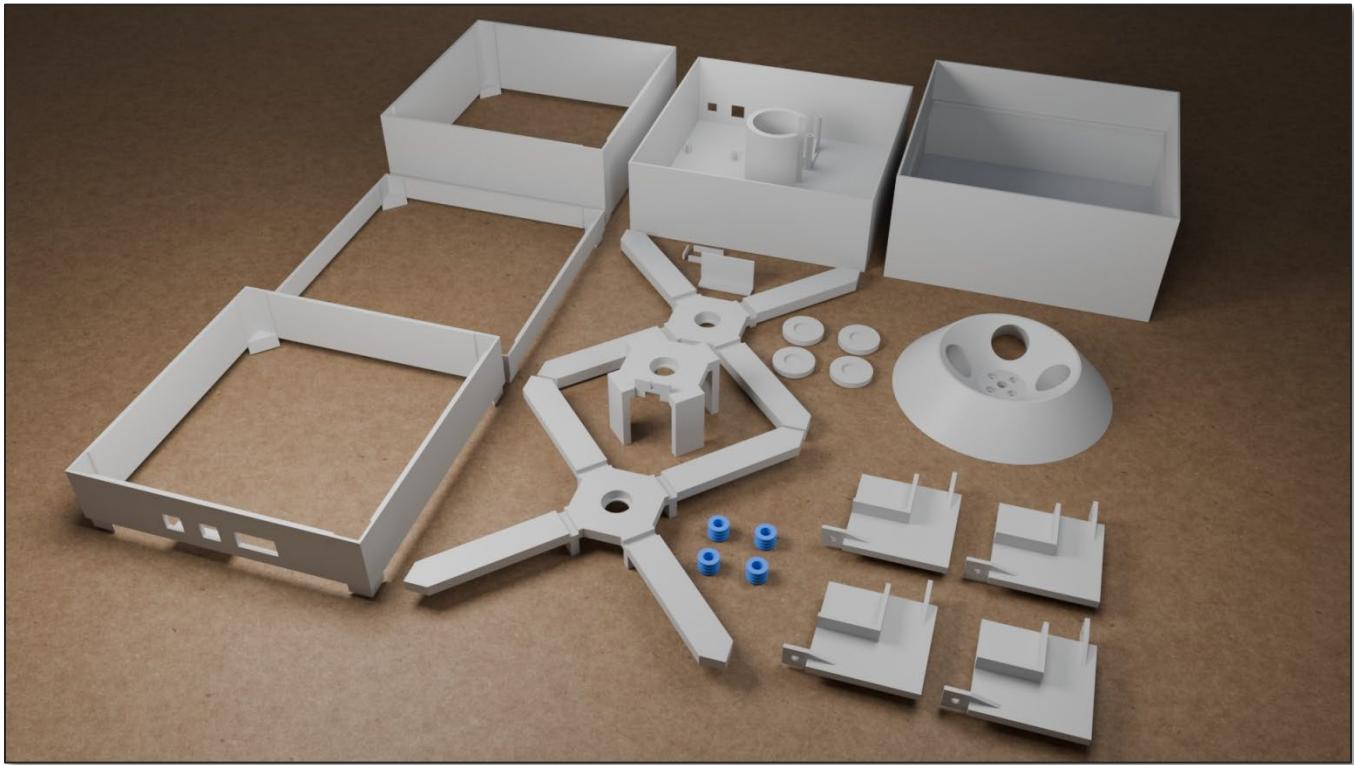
A set of 3D printed parts for one CENTRIFUGE device.
